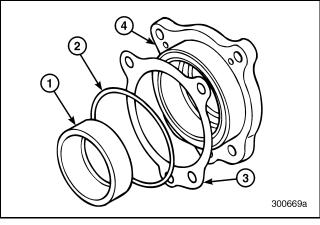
Exploded View of Rear Countershaft Bearing Cover
